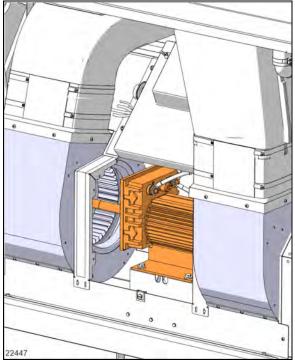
EVAPORATOR MOTOR ASSEMBLY
